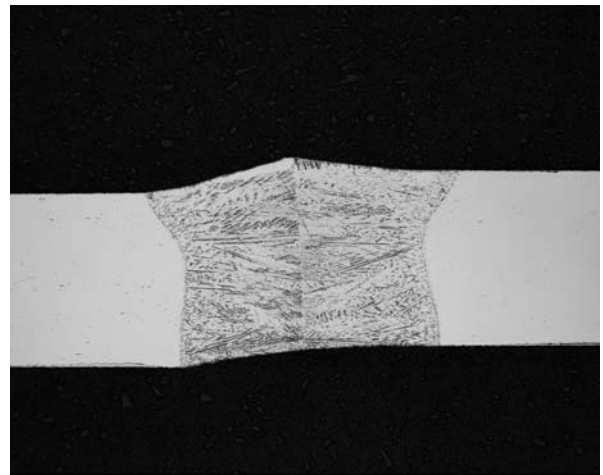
Cross section of IN625, welded in Argon, HPDL 1 kW, 600 mm/min
